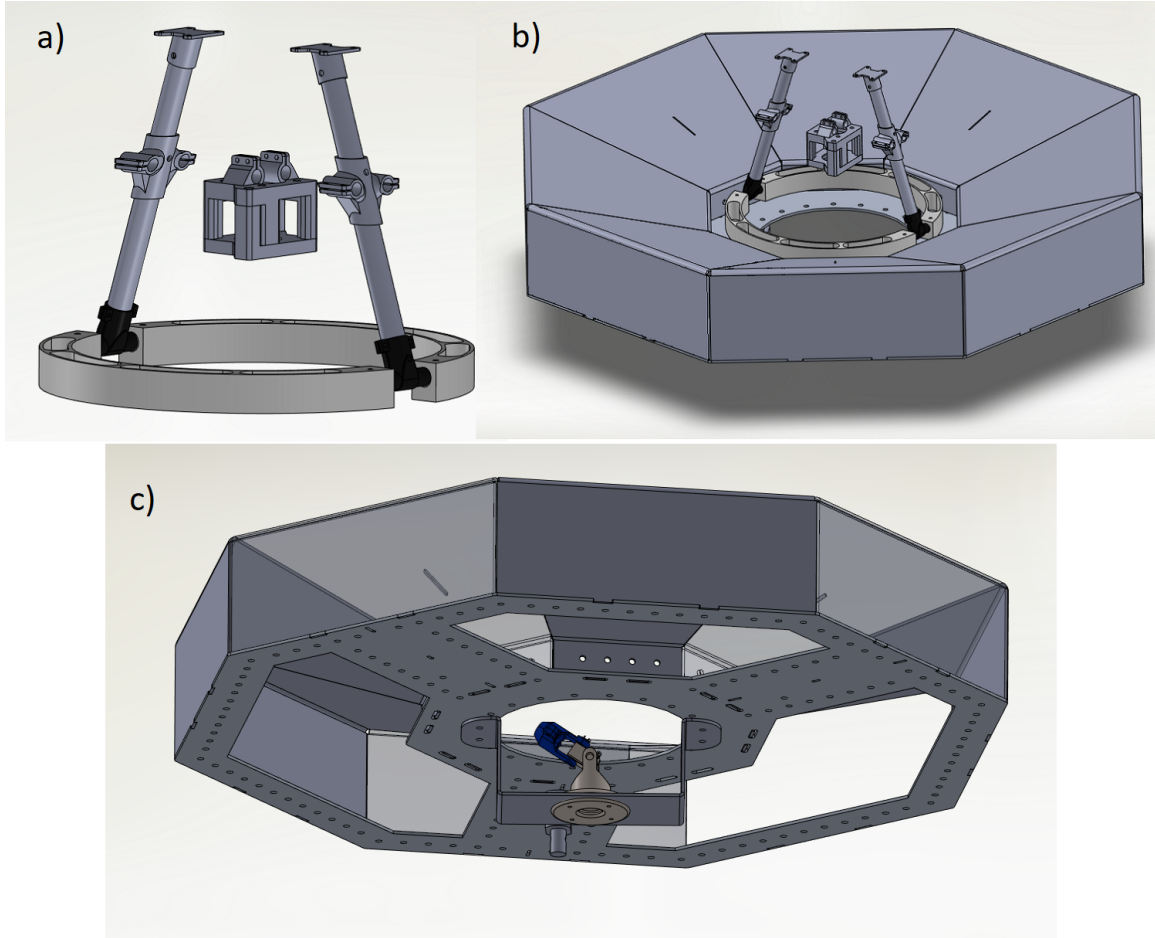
Landing gear design in Solidworks, a) is the landing gear alone with the joystick mount between the legs (the rods for holding the joystick mount are not visible), b) is the landing gear in on the landing pad to show how it fits and should be held in place, and c) is of the tether angle sensor mounted on it's bracket to show the angle limitations.
